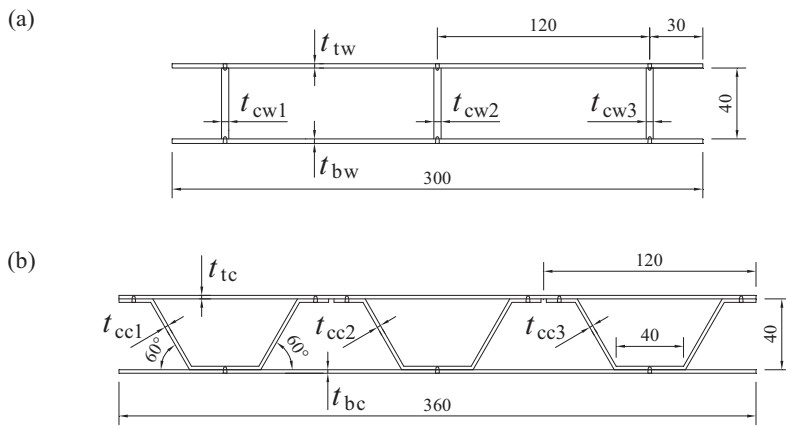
The cross-section dimensions for (a) web-core sandwich beam and (b) corrugated-core sandwich beam.
